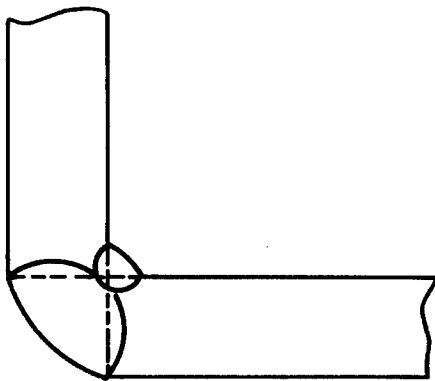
SINGLE-FILLET-WELDED JOINTS
